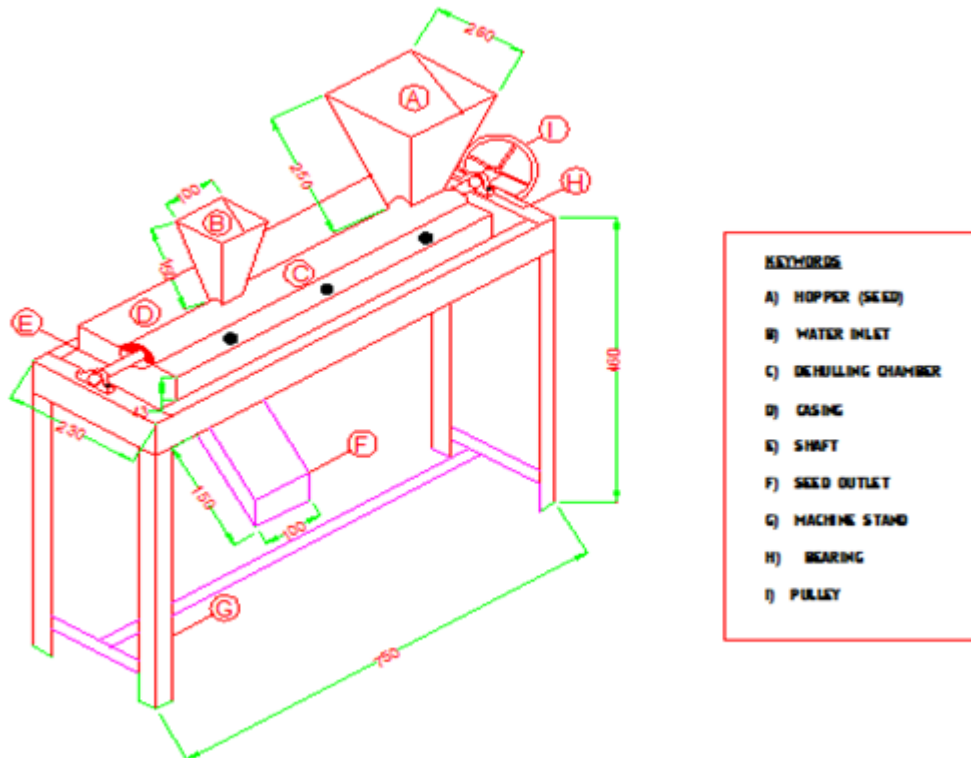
Isometric view of the soybean dehulling machine constructed. All dimension in mm.
